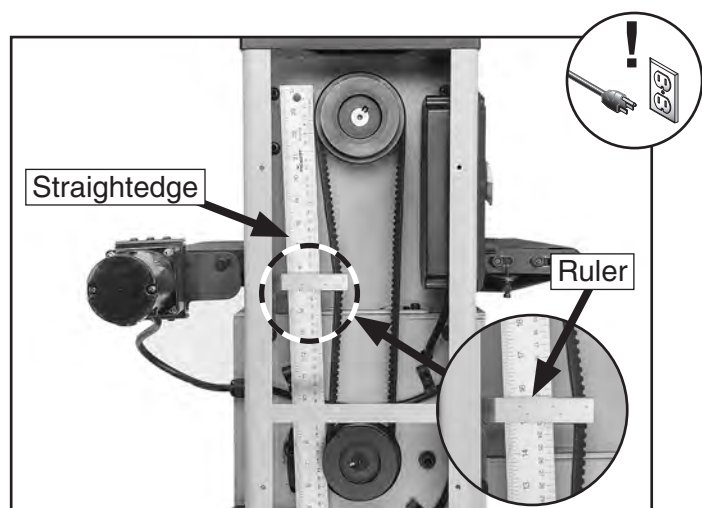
Checking V-belt tension with a straightedge and a ruler (belt access panel removed).
